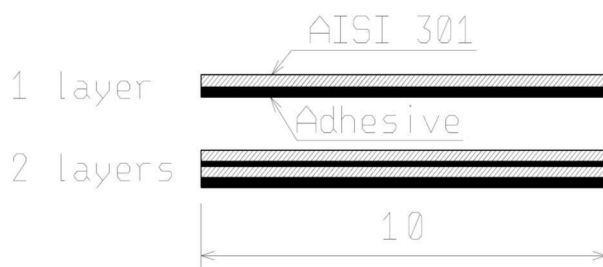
Bonded crack retarder cross sections. Dimension in mm, not in scale.
